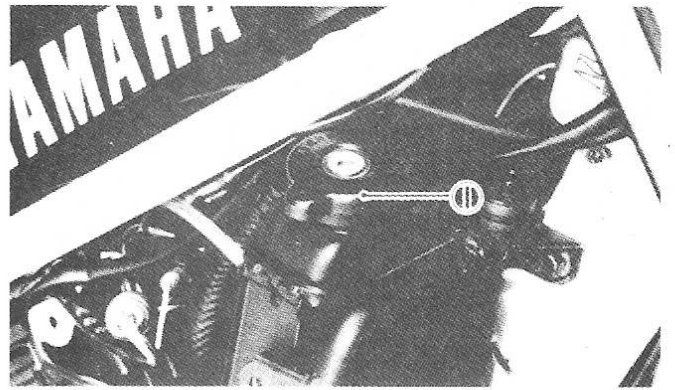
The right side shroud must be detached to gain access to the radiator cap (1) (Sec 43)
